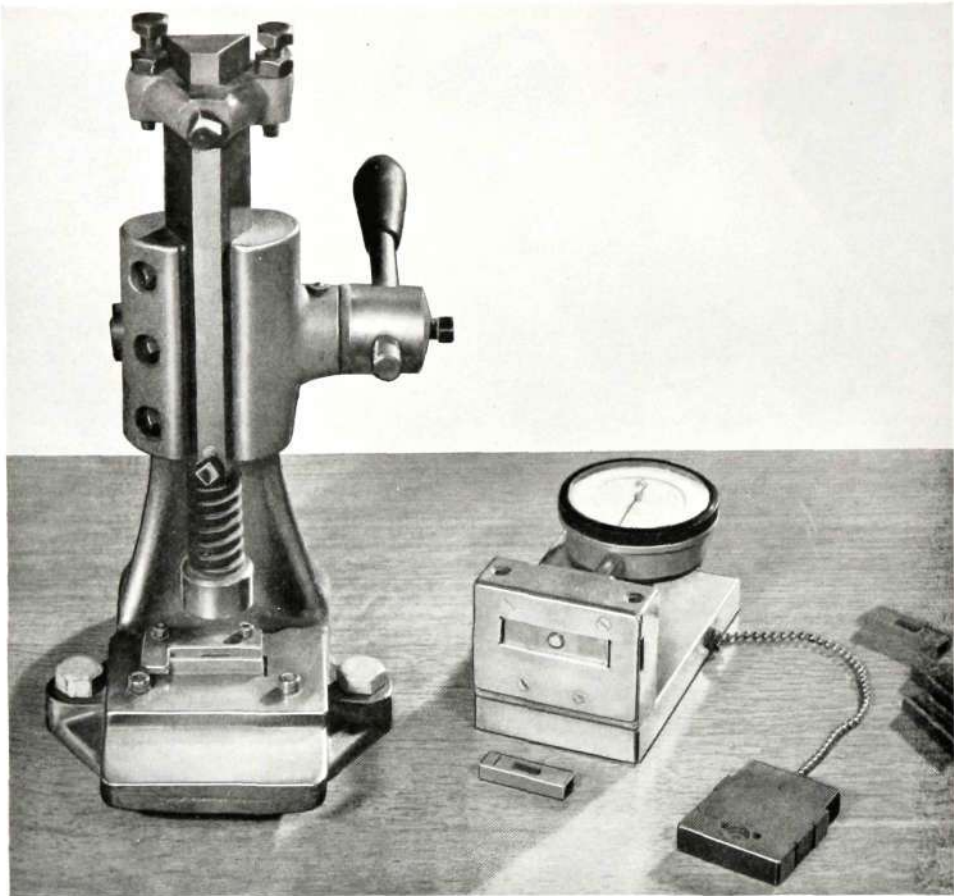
Press for inserting carbon electrode into the moulding of the Type 236 Protector
